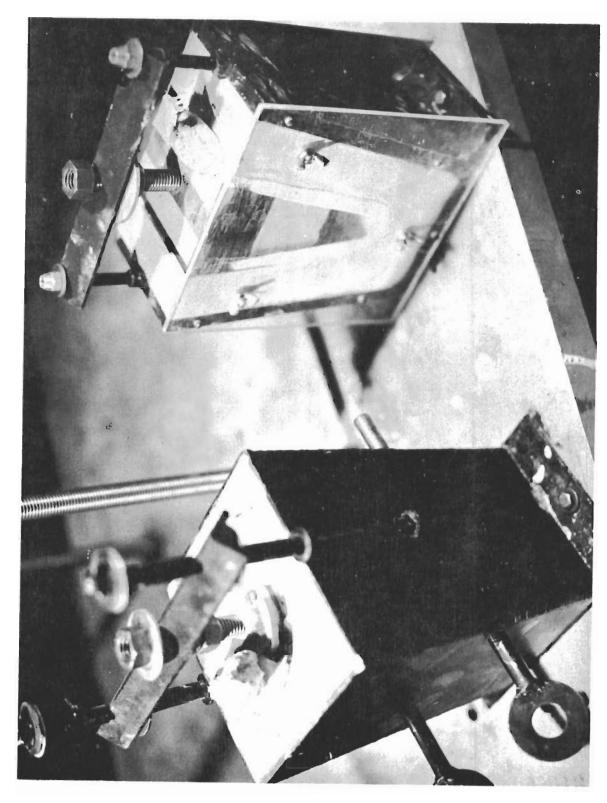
Casting TherMarq ZSF-124 in Model Nose Cone and Leading Edge Molds
